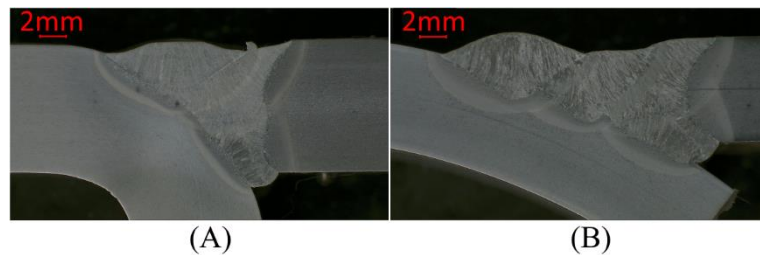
Welded joints with the base material and the bending radius of (A) S700MC, 5 mm; (B) S1100, 40 mm.
